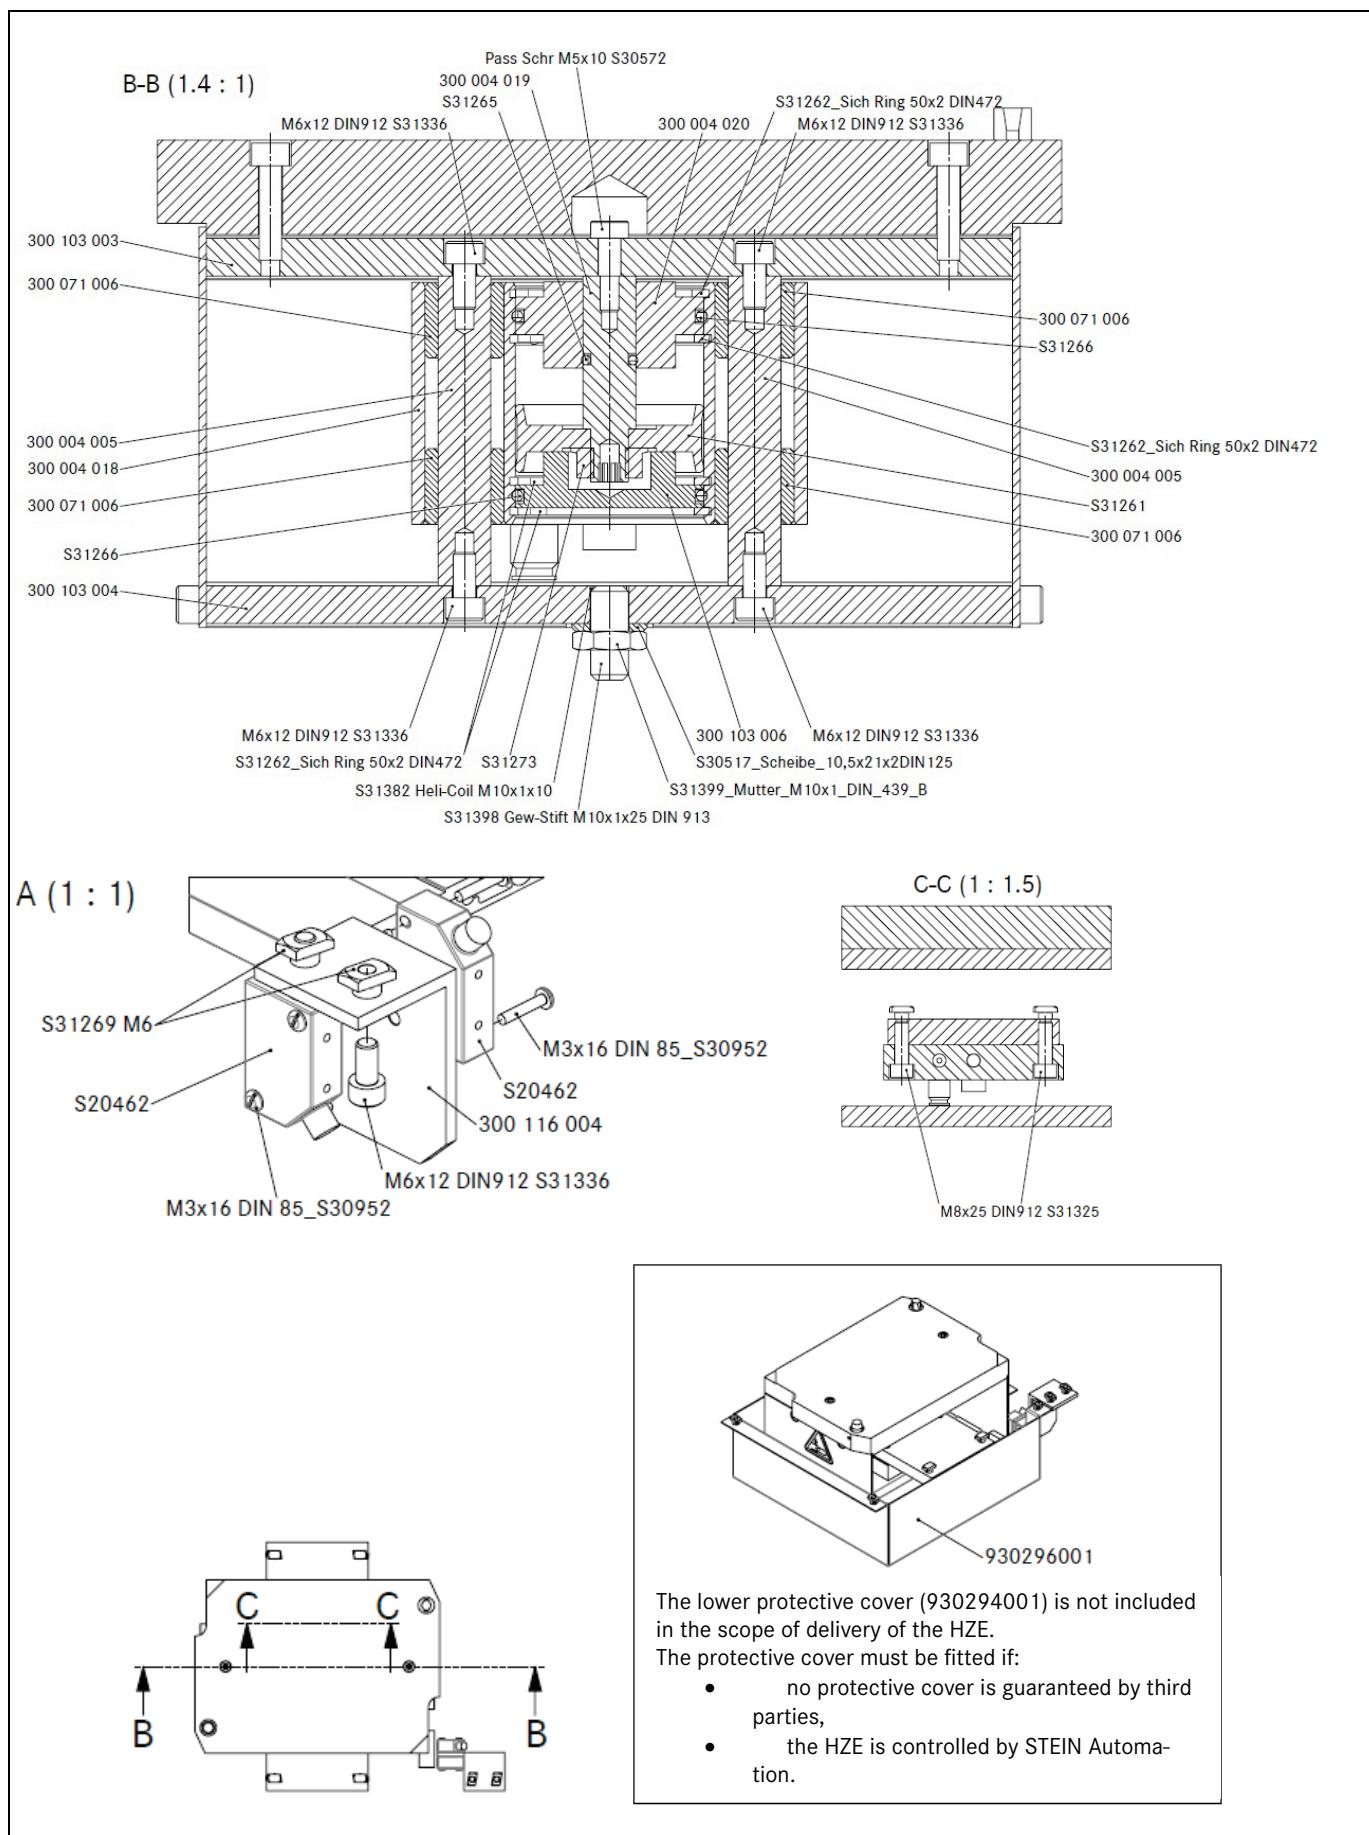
Lifting/centering device HZE with HGL valve - 930 138 001
